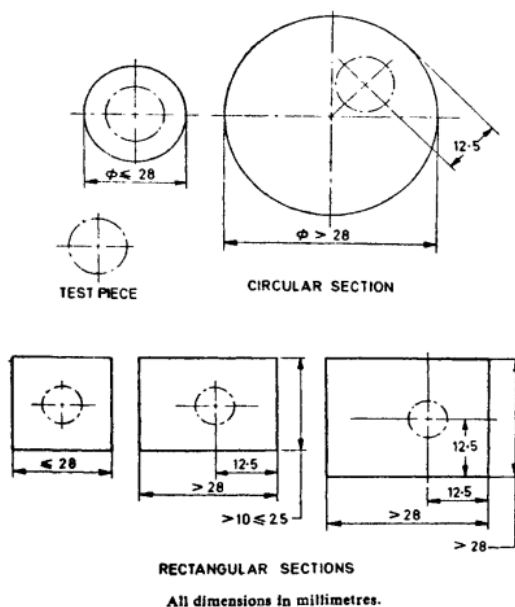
LOCATION OF THE TENSILE TEST PIECES IN THE PRODUCTS
